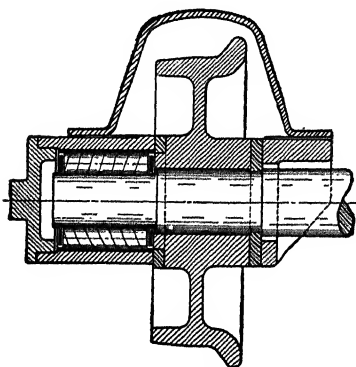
Arrangement comprising a combination of a turning axle with spiral bearing and a loose wheel.
